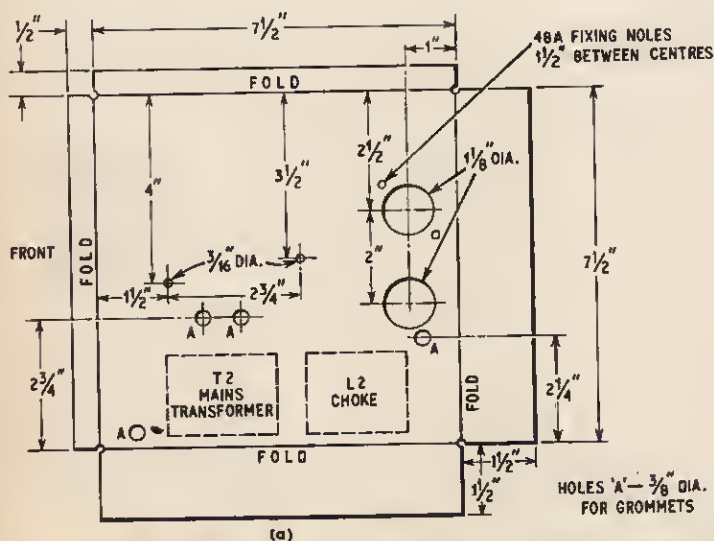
Drilling details of the power unit chassis with suggested positions of T2 and L2. The output transformer T1 will have to be fitted in position after final assembly according to the space available
